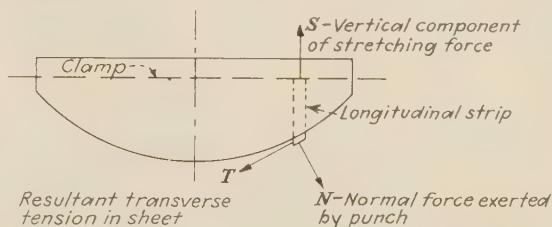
TRANSVERSE SECTION AT END OF PUNCH SHOWING FORCES ON LONGITUDINAL STRIP OF SHEET
